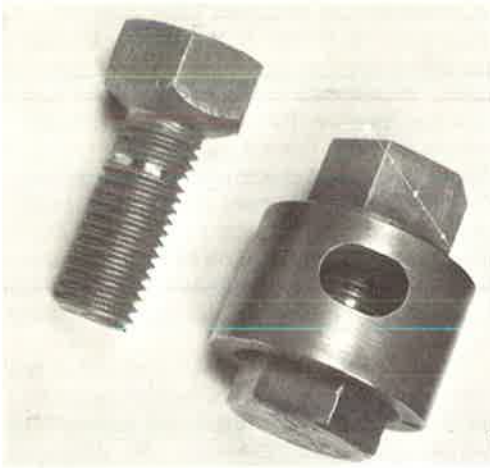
Machined bolt specimen and test block assembly for hydrogen-stress cracking experiments.
